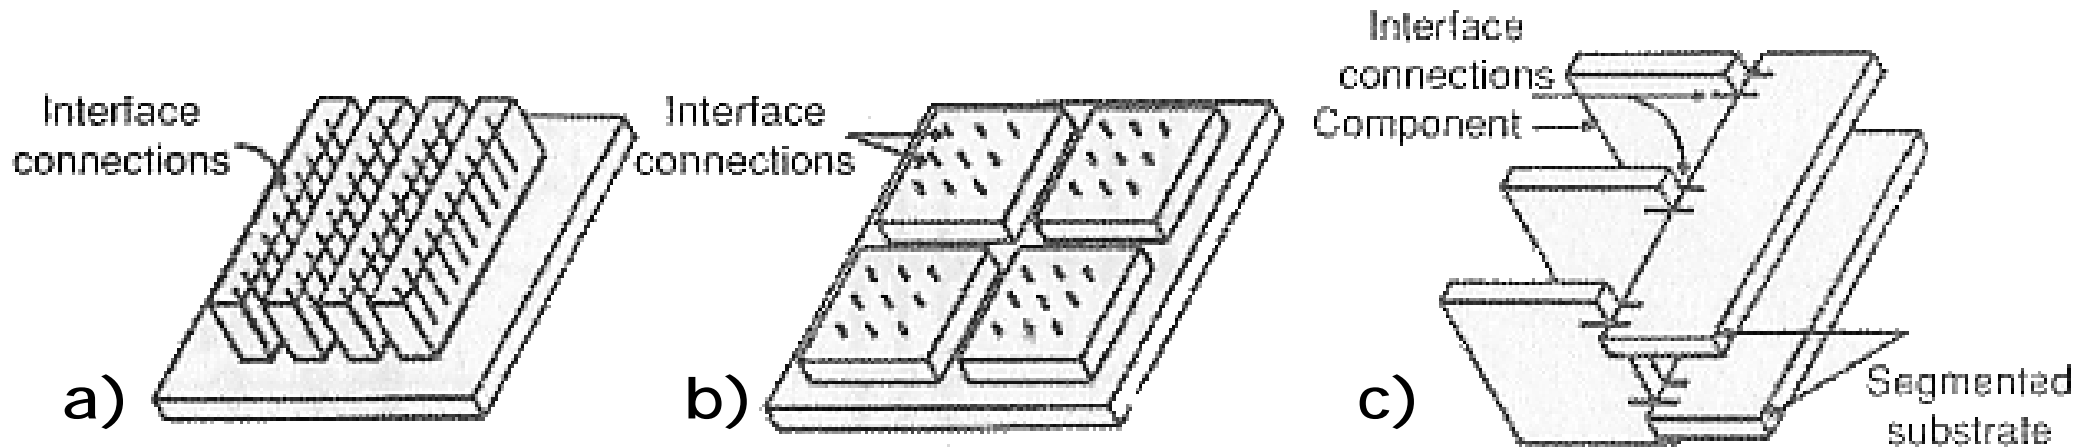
Joining configurations for 3D assemblies: a) Edge-plane; b) Plane-plane; c) Edge-edge.
